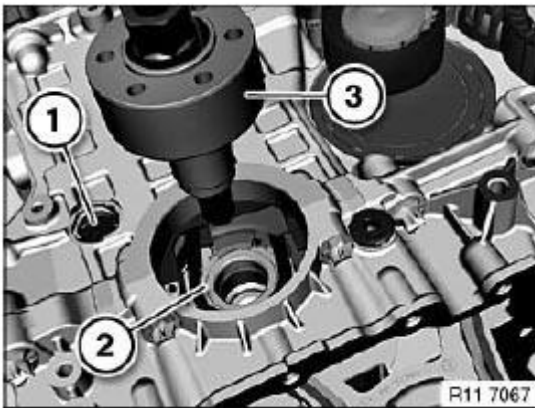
Identifying Bolt, Gear Wheels And Hub
